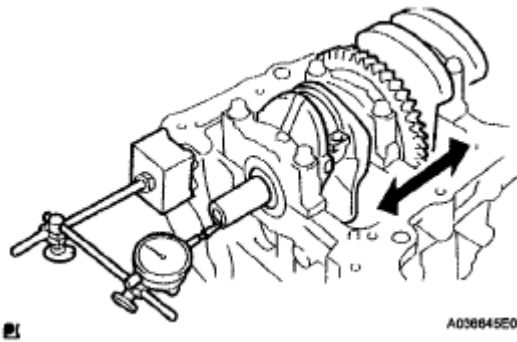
Measuring Thrust Clearance Crankshaft Back And Forth
